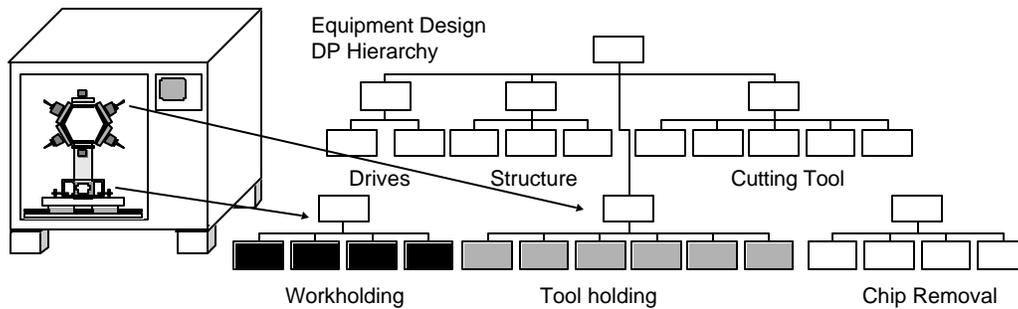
Elements of standard equipment design that may be designed by Axiomatic Design.
